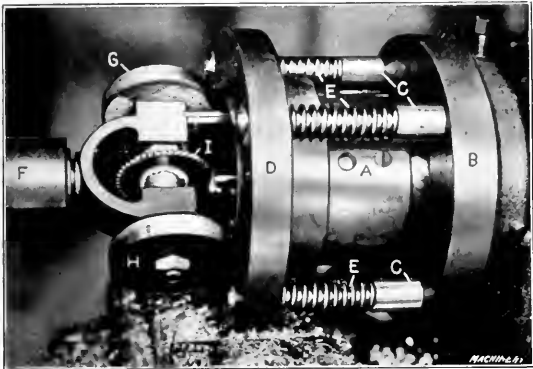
Cross-sawing Attachment for slotting the Brass Shells
